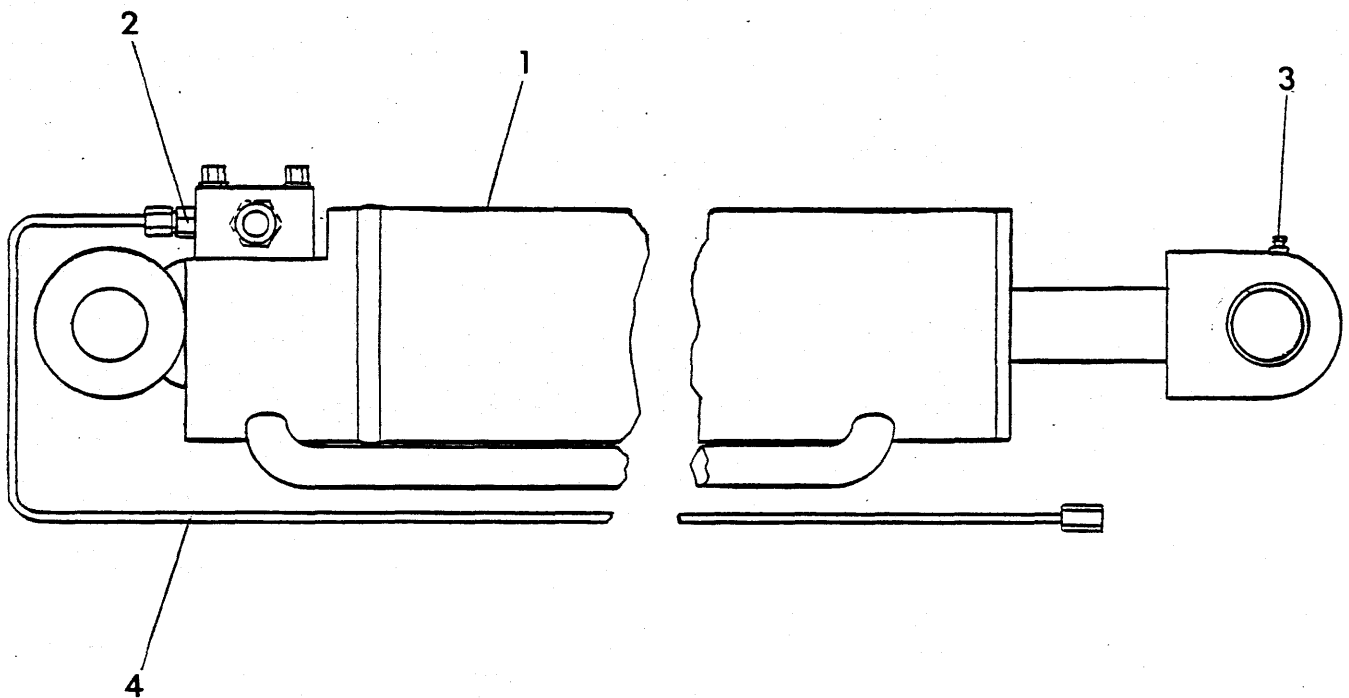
A SLAVE LEVELING CYLINDER, PARTS BREAKDOWN (ALL MODELS)
